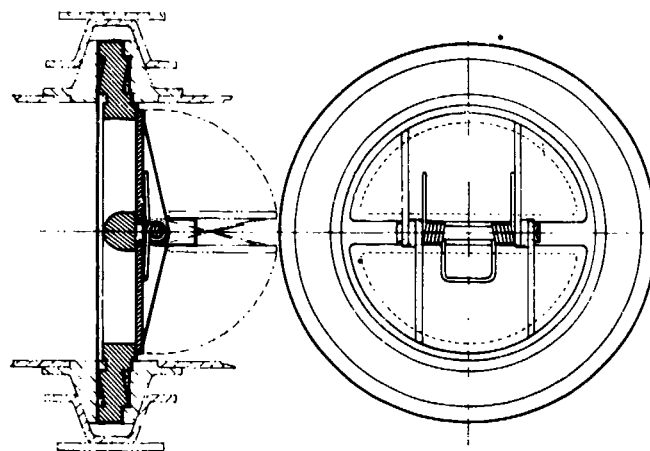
Split Flapper Check Valve for Clamp Mounting Between Flanged Ducts
